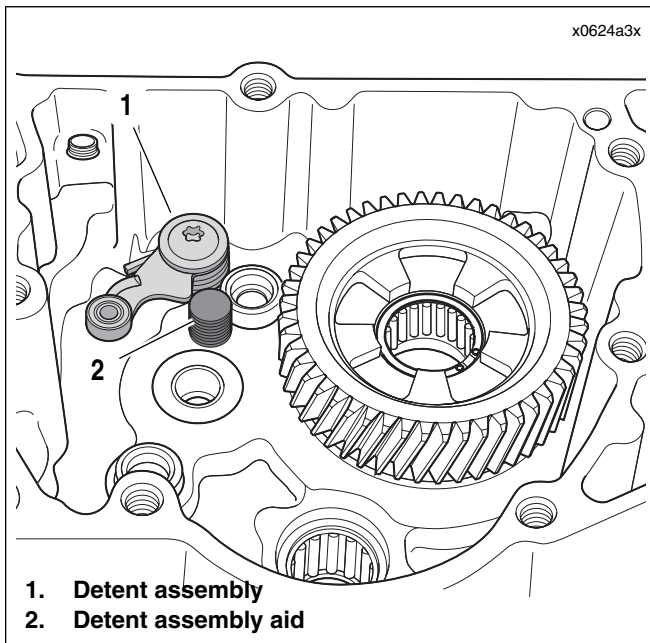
Using Gear Detent Assembly Aid (Part No. B-45520)
